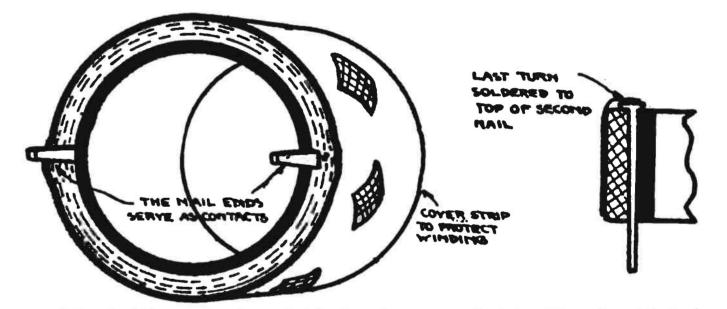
Illustrating how the cardboard tube is prepared for the winding and how the end of the wire is soldered to a copper nail which is afterward employed as a contact for use with the adapter.
